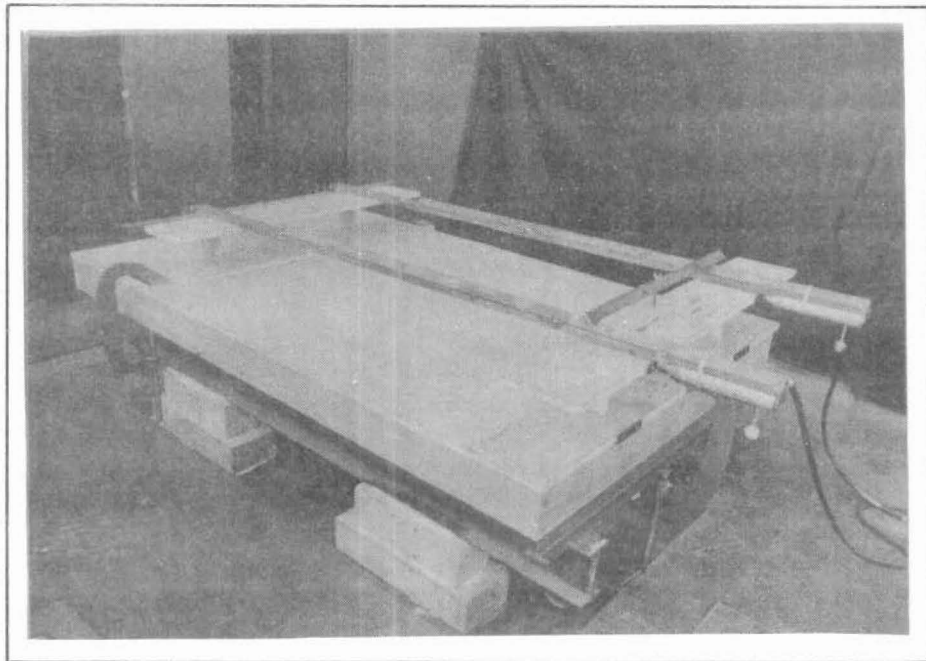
Assembly jig and cramps for prototype flexure elements.
